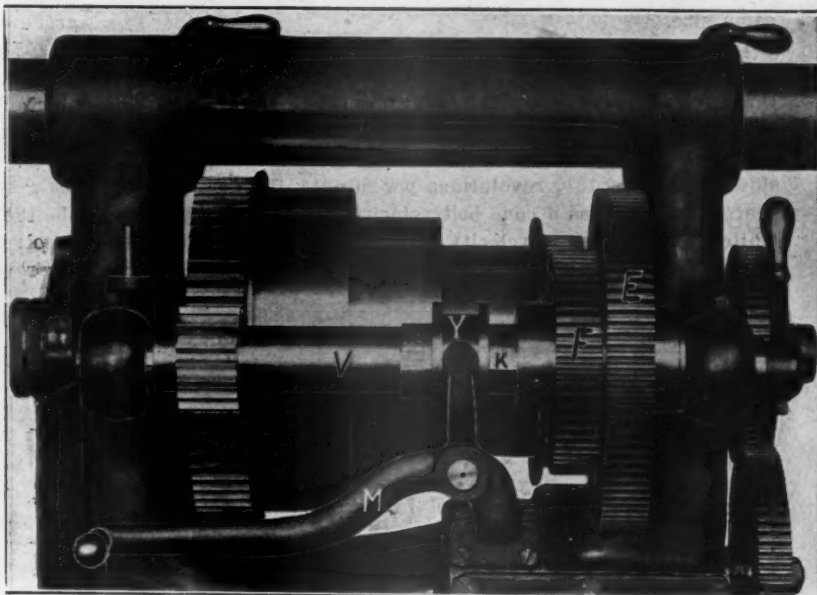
VIEW OF DOUBLE BACK-GEAR ATTACHMENT, SHOWING HANDLE FOR OPERATING THE FRICTION CLUTCHES.
